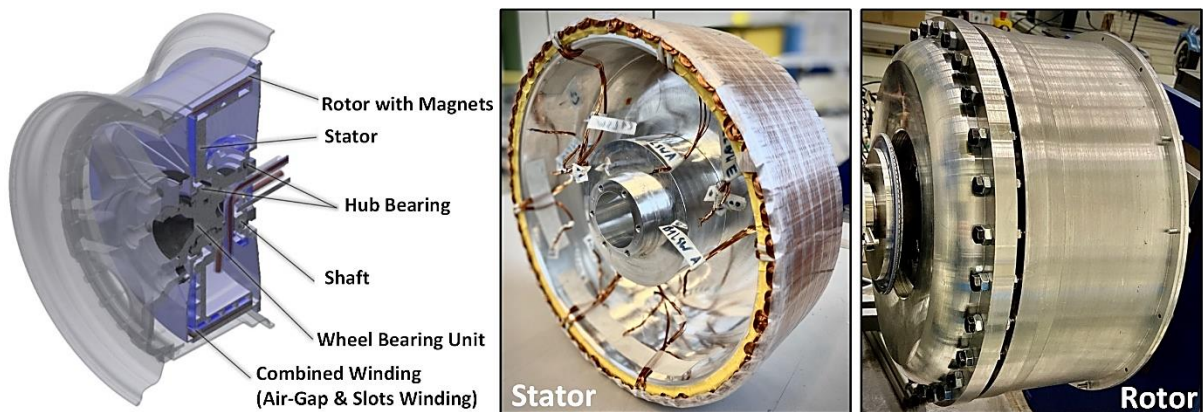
Combined Winding Wheel Hub Motor of OvGU, left: CAD model, right: Prototype [6].
